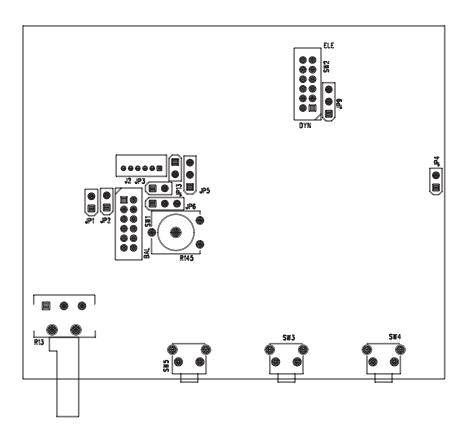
Internal Switches, Jumpers and Adjustments. Note, if you have 9350-7749-000 board, figure 4 on page 19.
